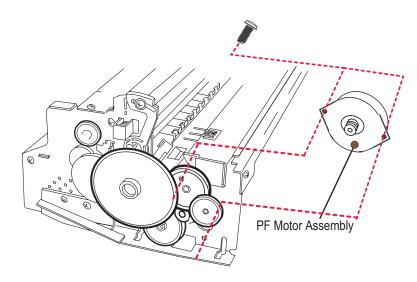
Removing the PF Motor Assembly (Stylus COLOR 440, 640)
